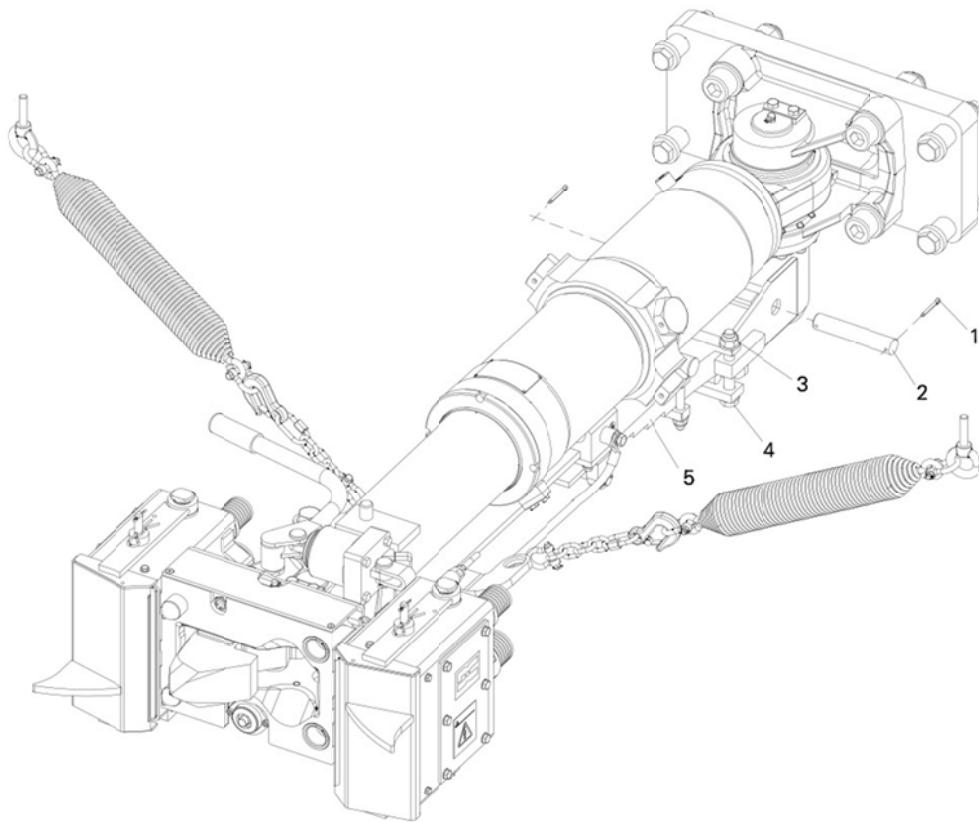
SUPPORT SPRING ASSEMBLY PIN REPLACEMENT
